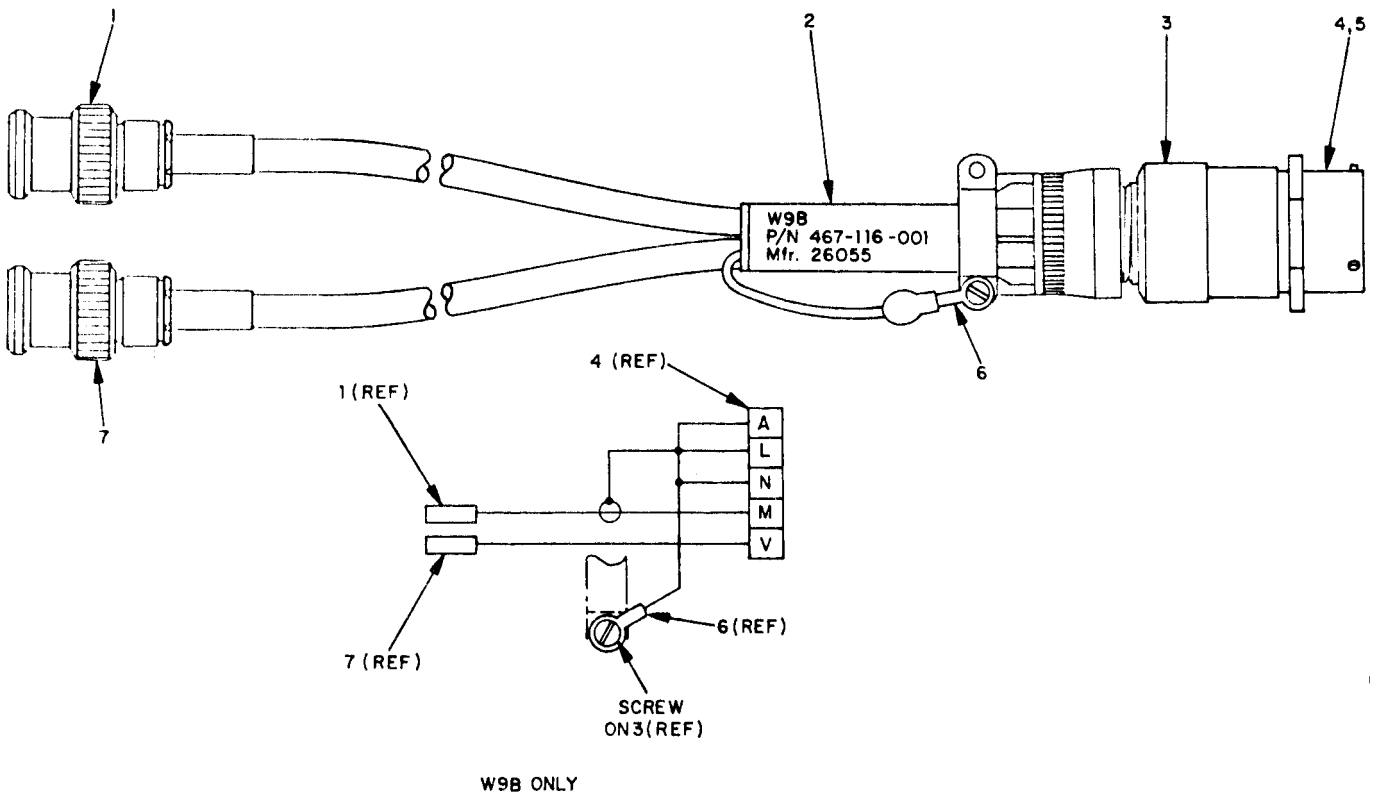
Adapter cable assembly W9B, part number 467-116-001
